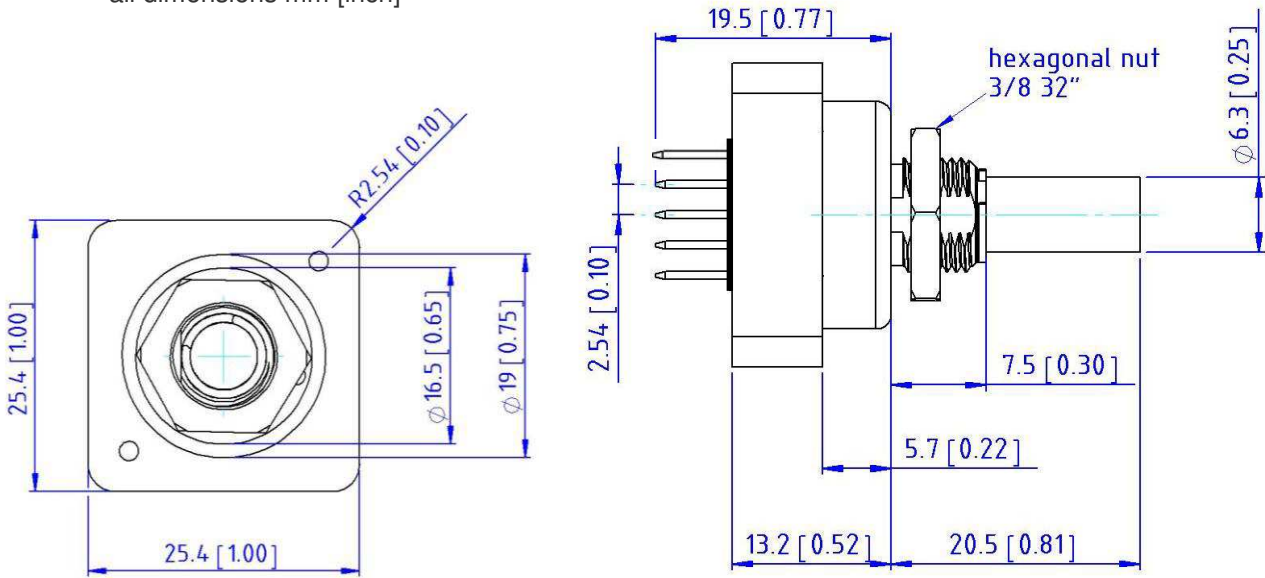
Dimensions of the ED-17-BB-512-S-P (top and side view)
